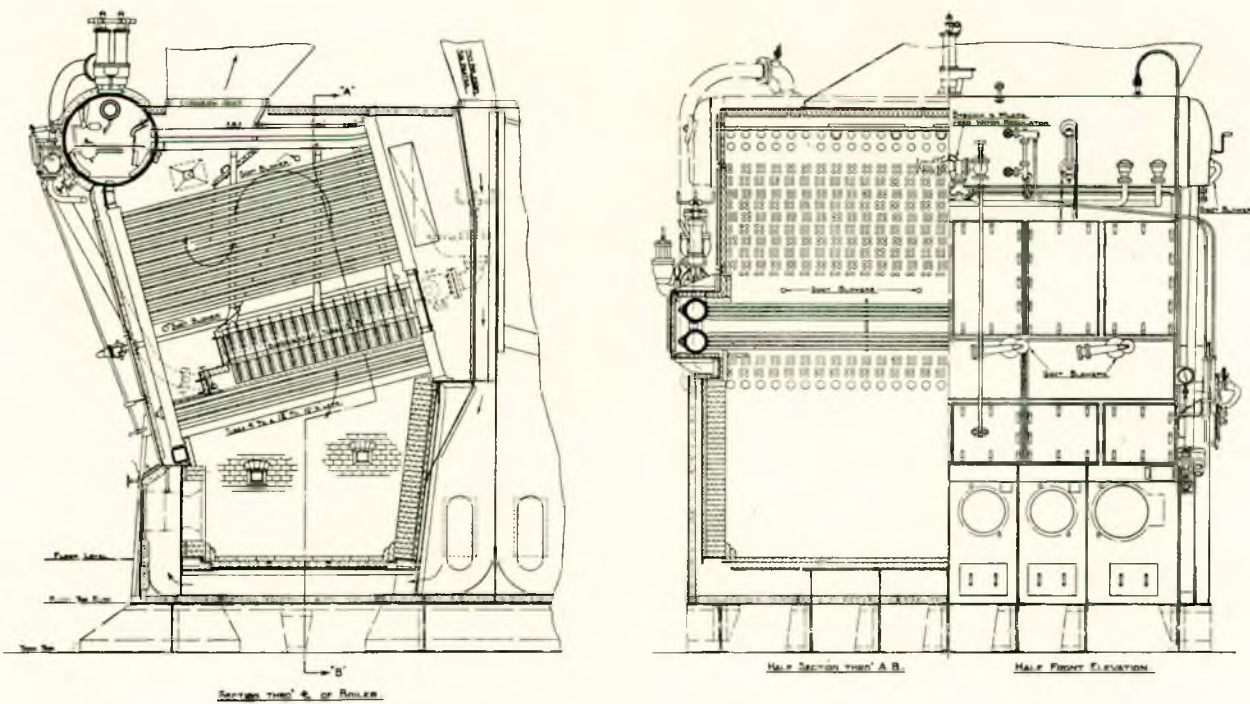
Babcock & Wilcox boiler with interdeck superheater.
